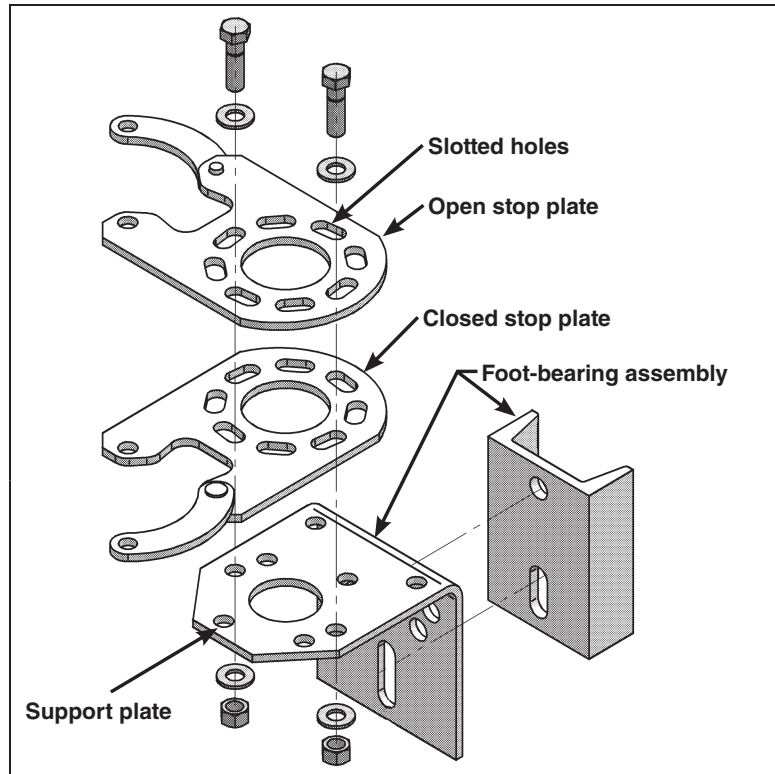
Exploded view of stop plates and the foot-bearing assembly.
